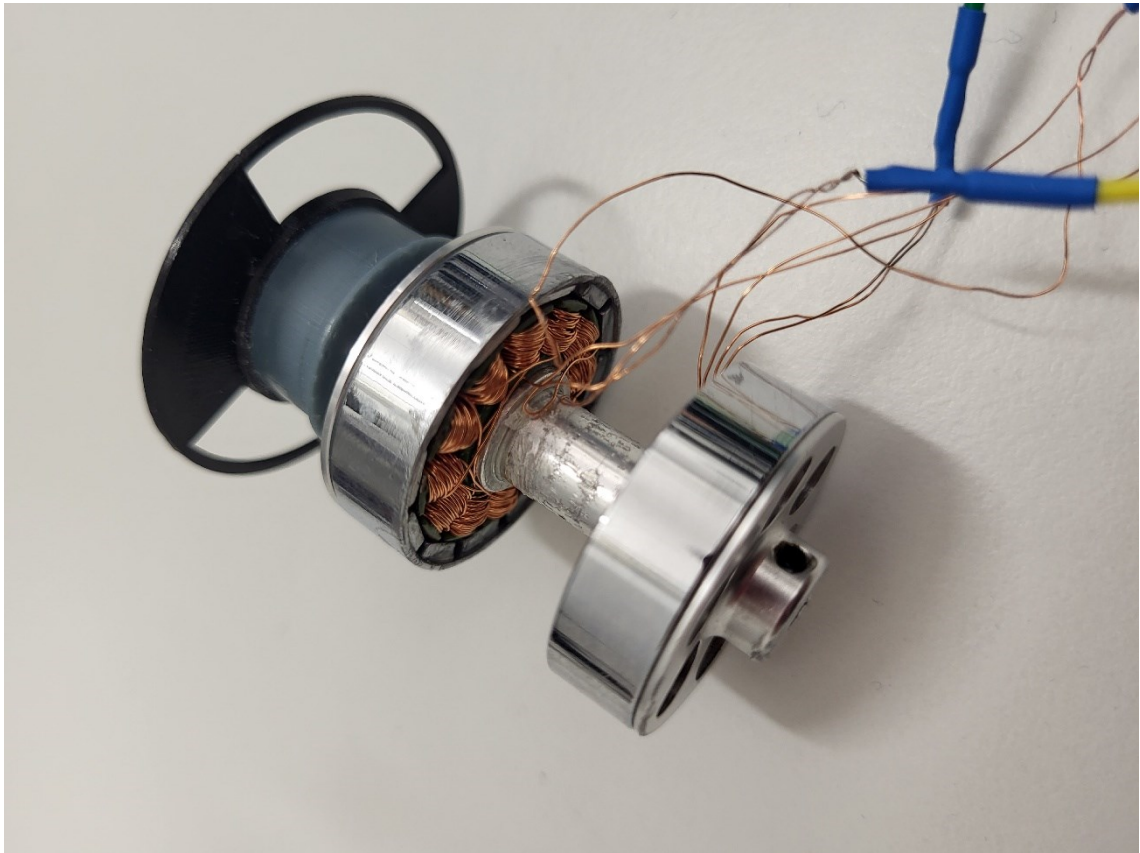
The stepper motor modified out of two BLDC motors. The two stator parts were connected to each other with the aluminum pipe of the original BLDCs and the original power shaft was replaced. As the rotors were attached to the shaft, they were misaligned by one tooth. The black encoder wheel was attached to the motor to measure rotational speed during the torque measurement process.
